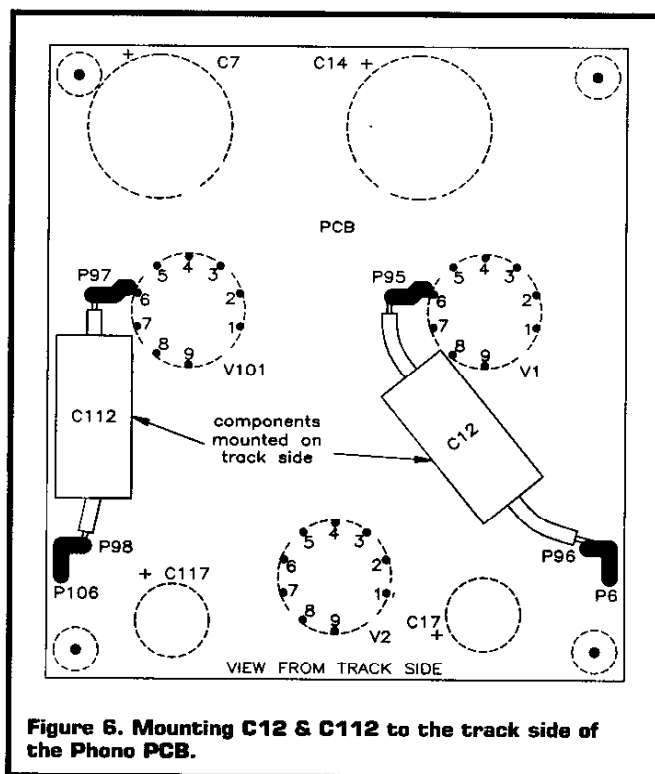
Mounting C12 & C112 to the track side of the Phono PCB.
